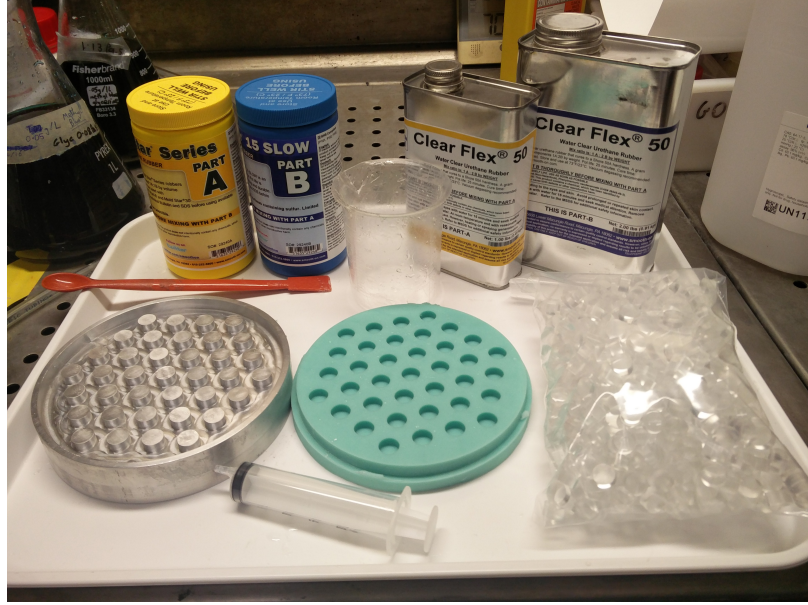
Casting materials for the *Mold Star* mould and *Clear Flex 50* particles.
